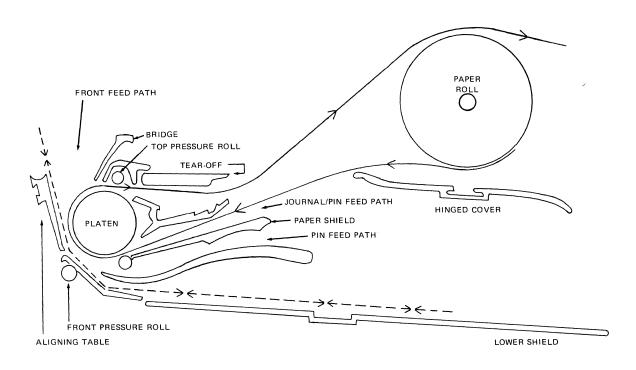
Front Feed and Journal Paths, Basic Front Feed Form Handlers
